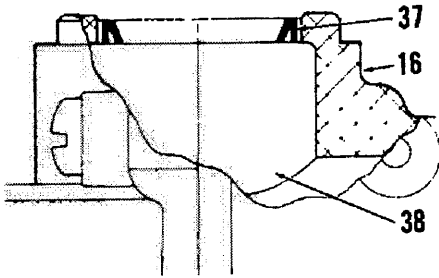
Seal (37) at magneto end of crankcase (16) should be pressed in until it is flush or no more than 1/32 inch (0.8 mm) below surface. Refer to Fig. E3-19 for proper installation of bearing (38).
